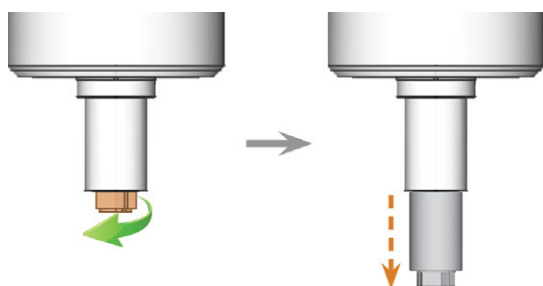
UNSCREWING THE COLLET CHUCK (MARKED ORANGE IN LEFT ILLUSTRATION) WITH YOUR HAND
